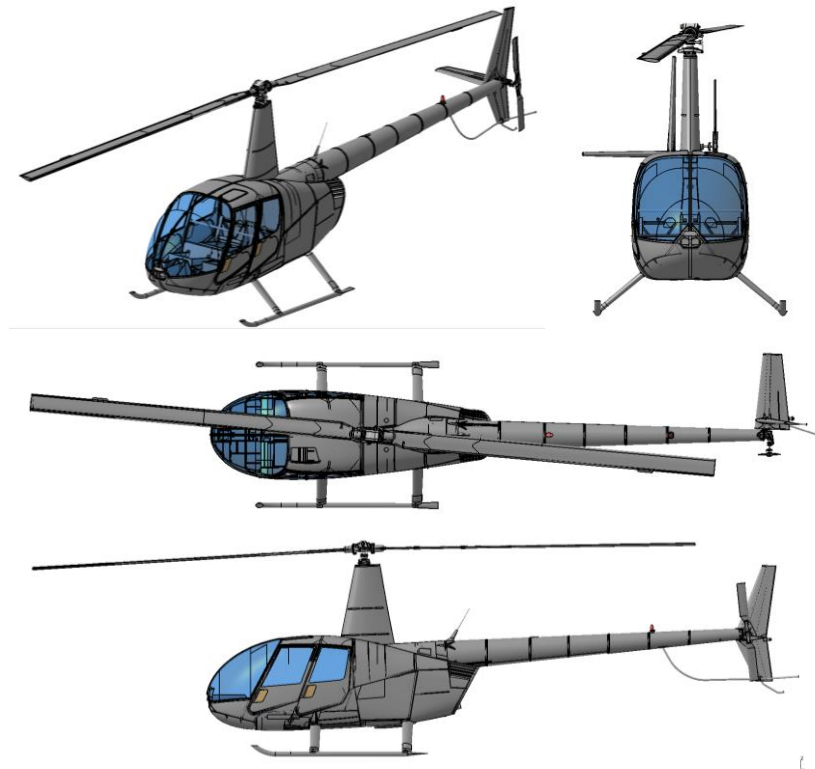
Representative R44 rotorcraft CAD model developed by NIAR.
